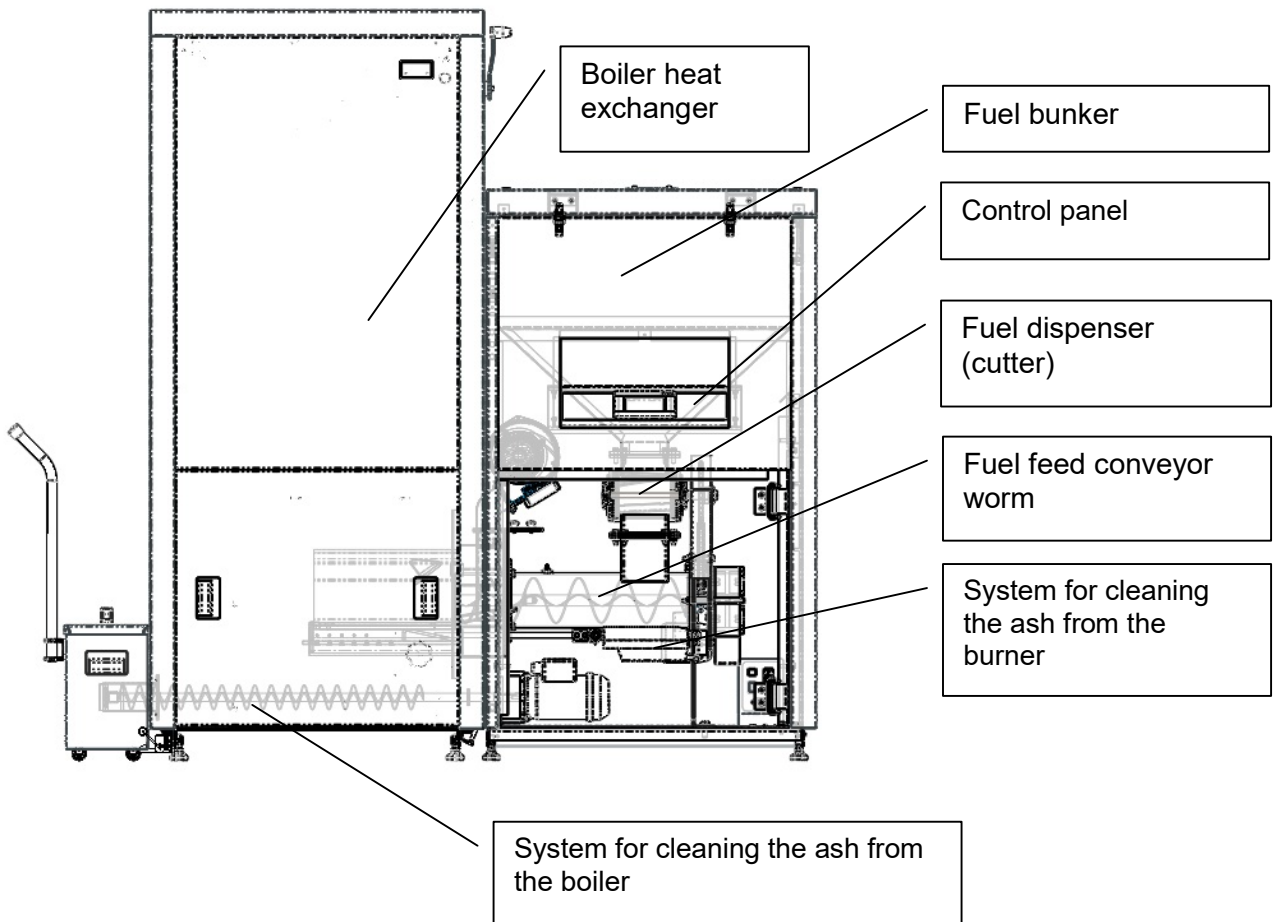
View of pellet hot-water boiler "Pelletherm V.2 M03" - top view.
